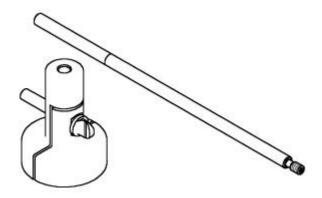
REMOVER/INSTALLER - 8641 Courtesy of CHRYSLER LLC
